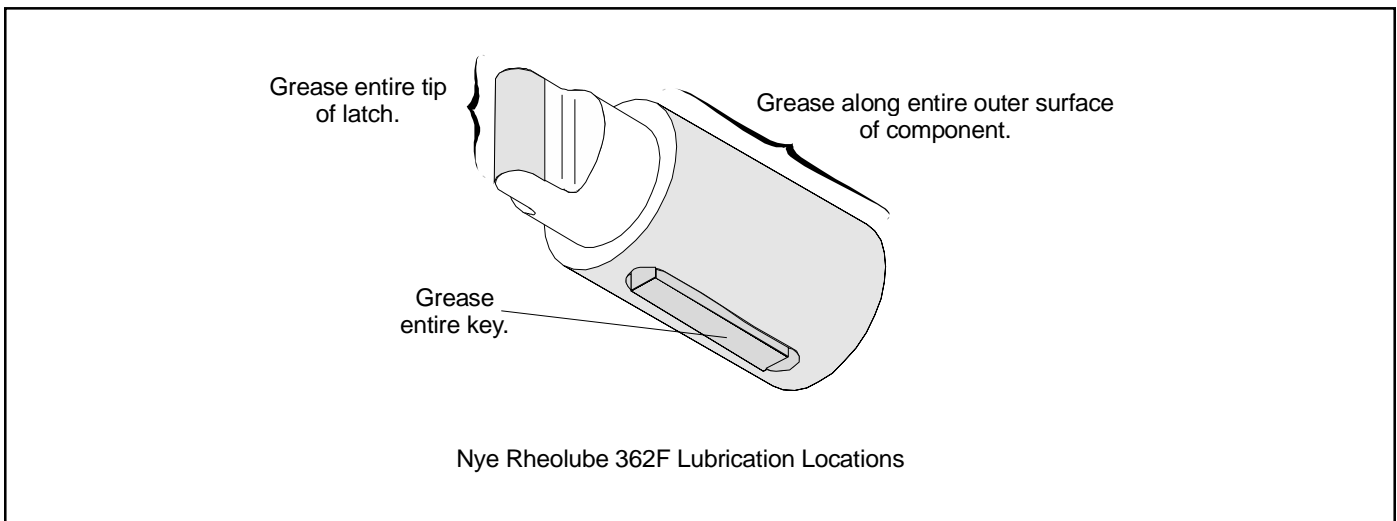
30 Type CDW Brake Valve Quadrant Latch
